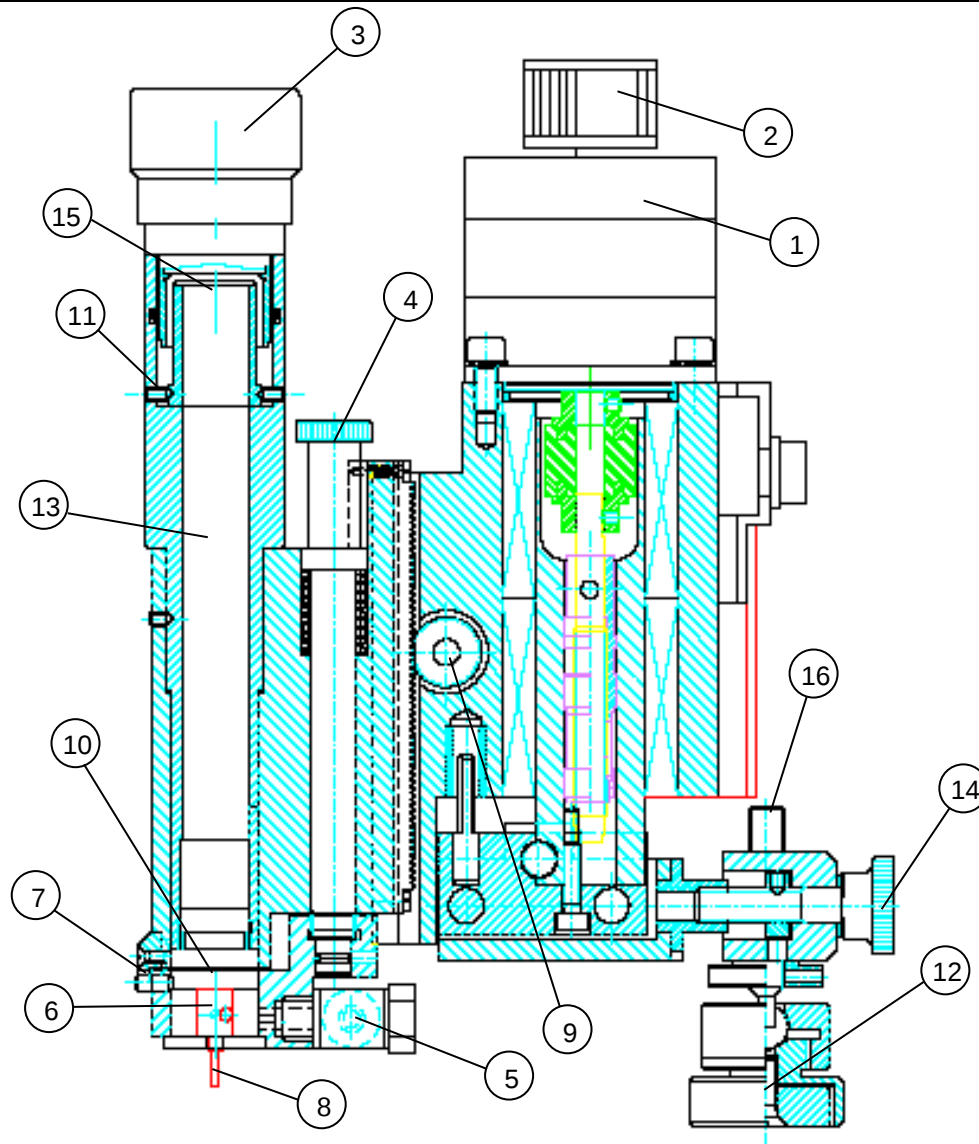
Mechanical-Optical Device – Cross Section
